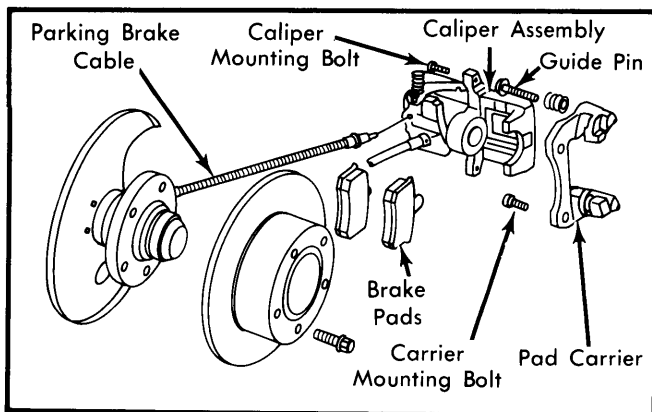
Exploded View of Audi Turbo Rear Disc Brake Assembly
